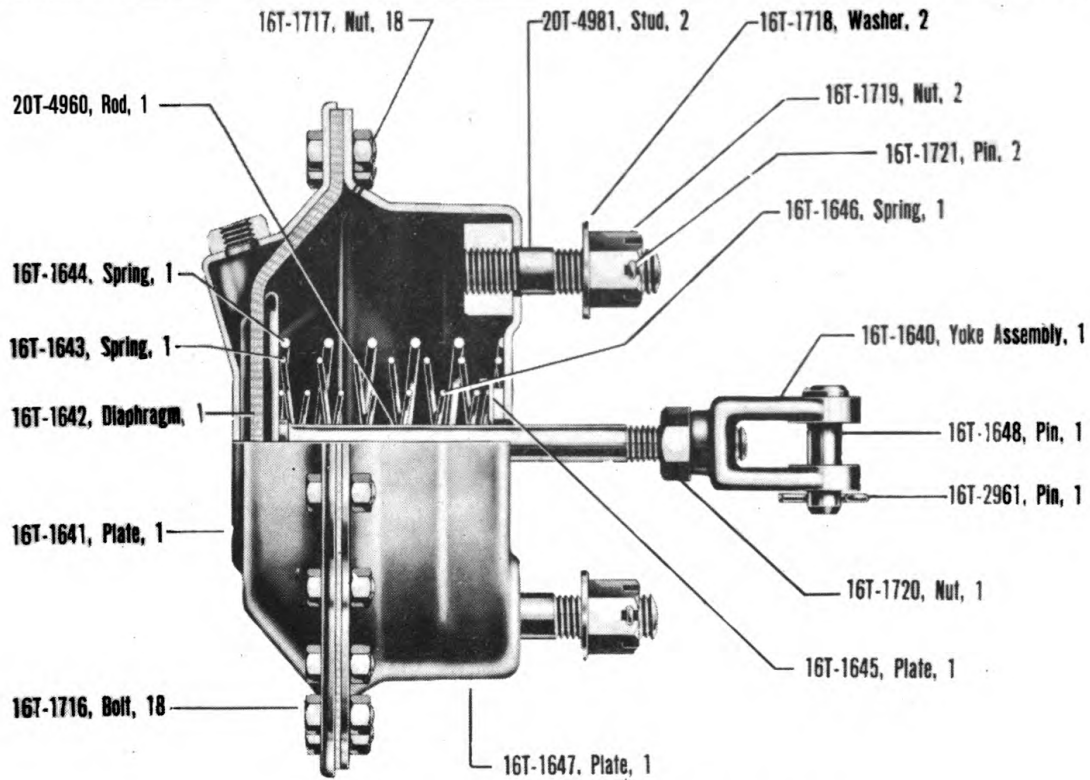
Front Axle Brake Chamber, Type B 20T-4940
